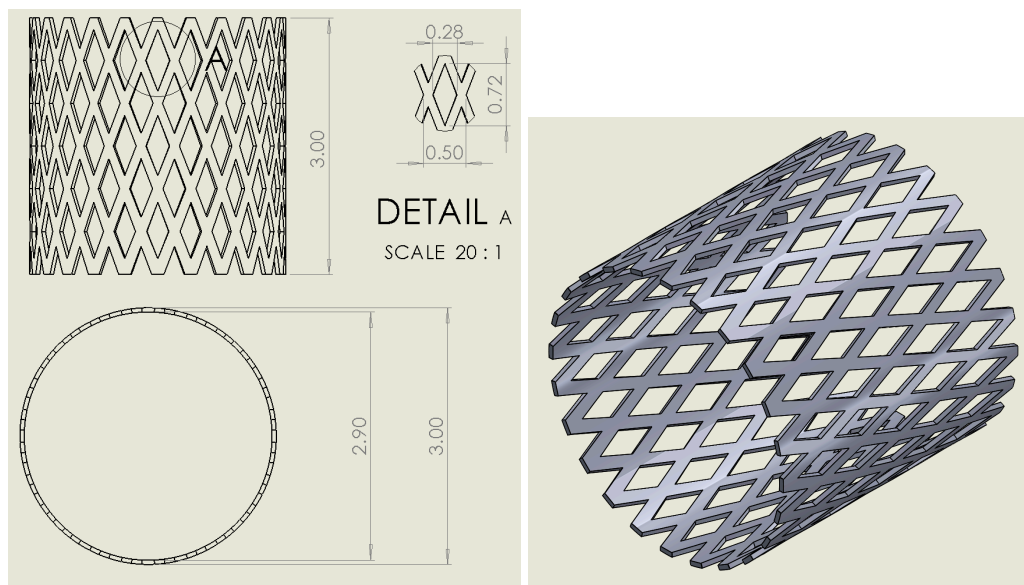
SolidWorks drawing showing the stent model with dimensions.
